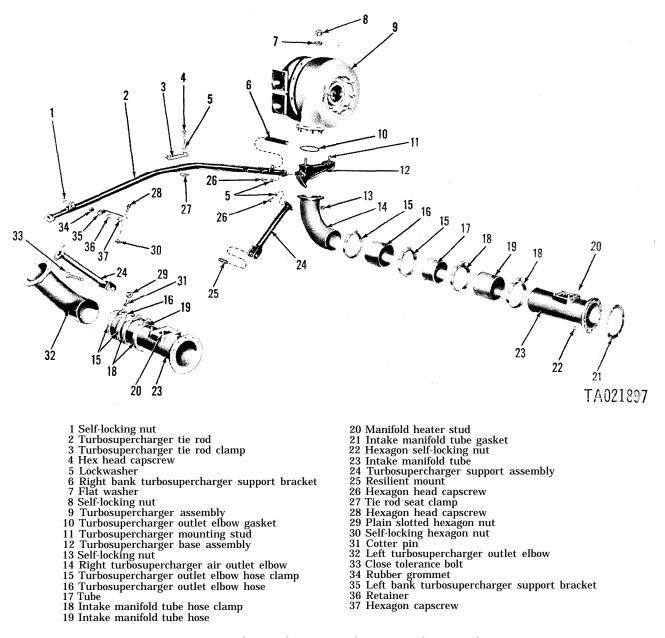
Turbosupercharger, tie rod, support and associated parts.
